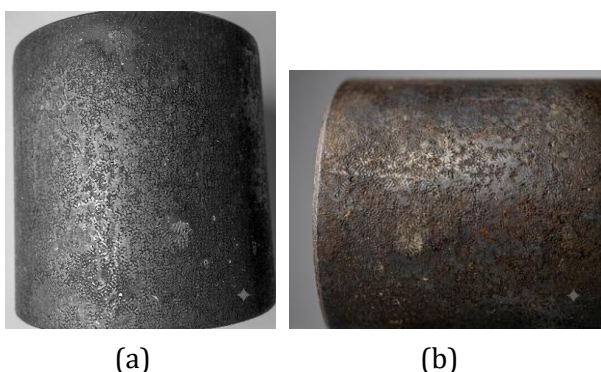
Cylindrical rollers removed from the bearing, showing deterioration consistent with that observed on the steel raceways.
